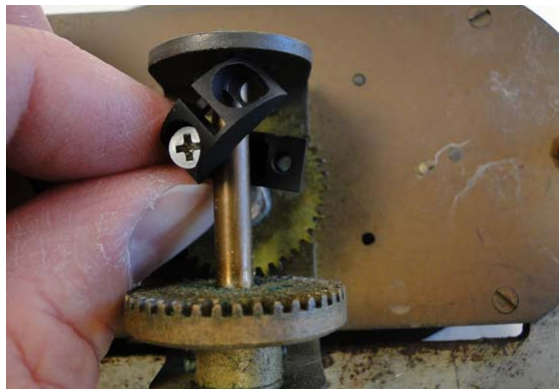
9. Place the Screw-bearing Notched Wheel Around the Index Drive Shaft
